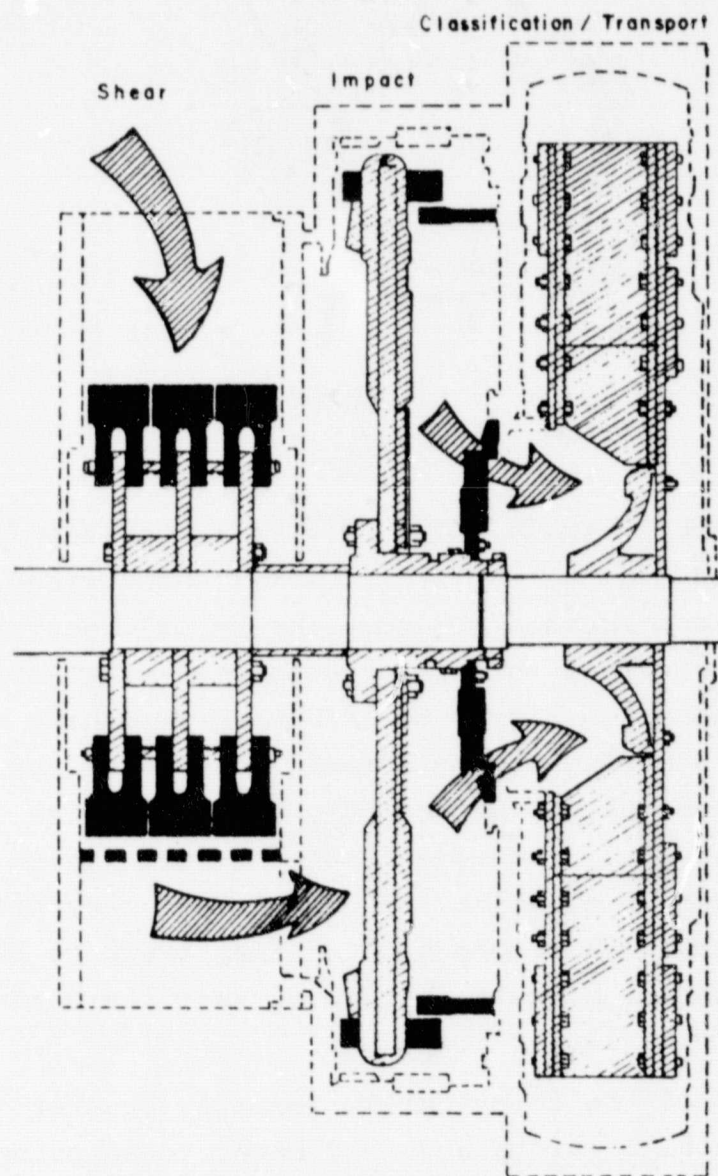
Staged grinding in an impact mill (ref. 3-4).
